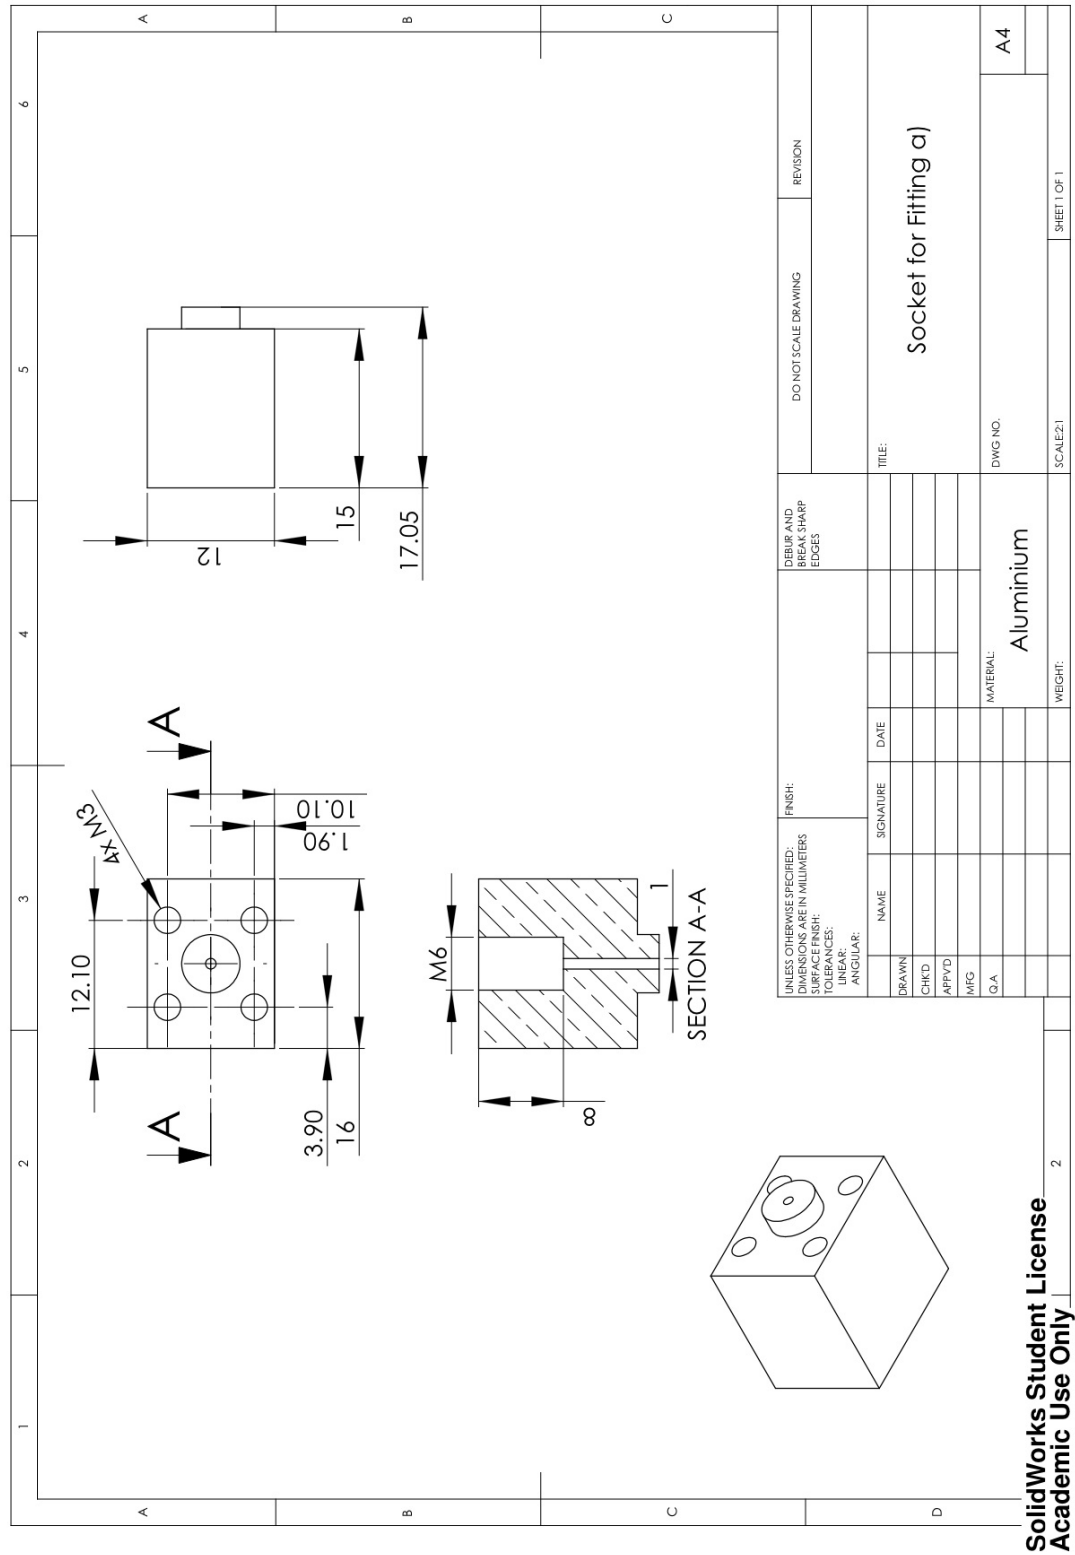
Socket for fitting - Type A - Dimensions in mm.
